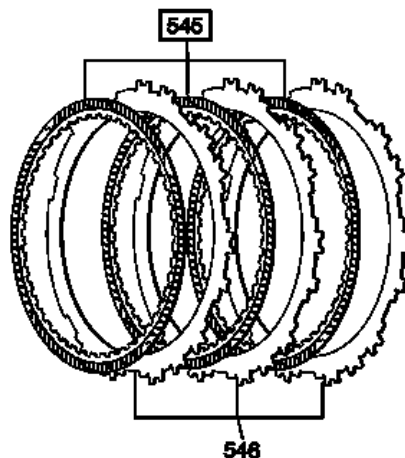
Low And Reverse Plate Assembly (Gen 2) 24260696
